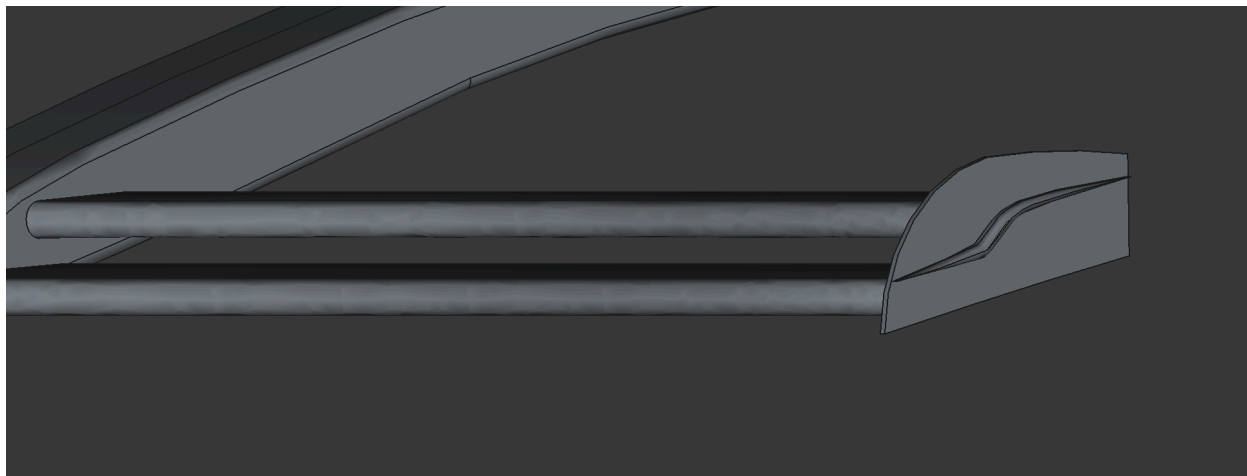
Rear view of the Nose Cone to show bubble design and taper
